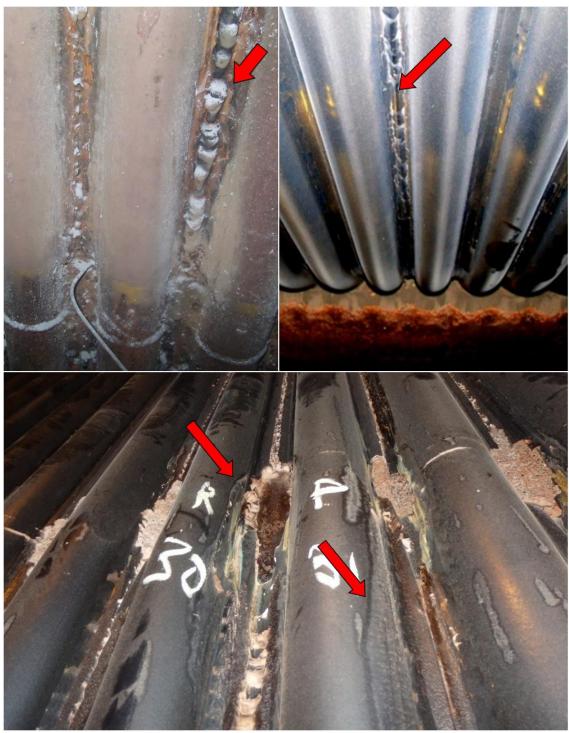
to 27: The top photos show the no finish / poor finishing of fins leading to erosion of the tubes at the fin to tube weld zone. Many of the construction engineers or inspection engineers are not aware of this requirement. The main reason for this discrepancy is that no scaffolding is carried out to finish the welds on the fire side. Scaffolding or floating platform materials must be envisaged in the procurement stage itself.
